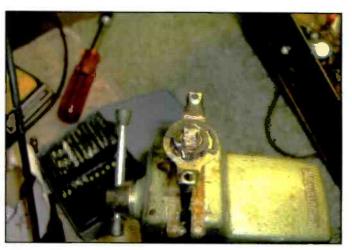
Photo G Here's a good view of the end of the shaft where the device that drives the switch wafer is attached. The repair involved drilling and tapping the shaft so a 4-40 screw could be used to hold the assembly together.
